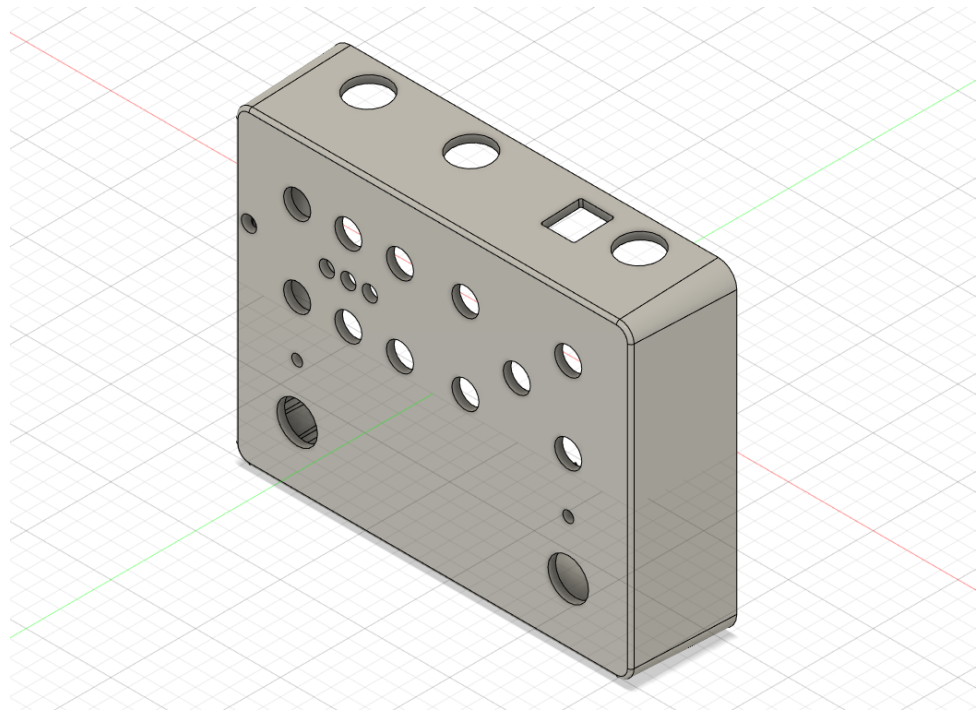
First drawing of the pedal layout, empty 3D model of the Hammond 1590 enclosure is from Hammond manufacturing [3].
